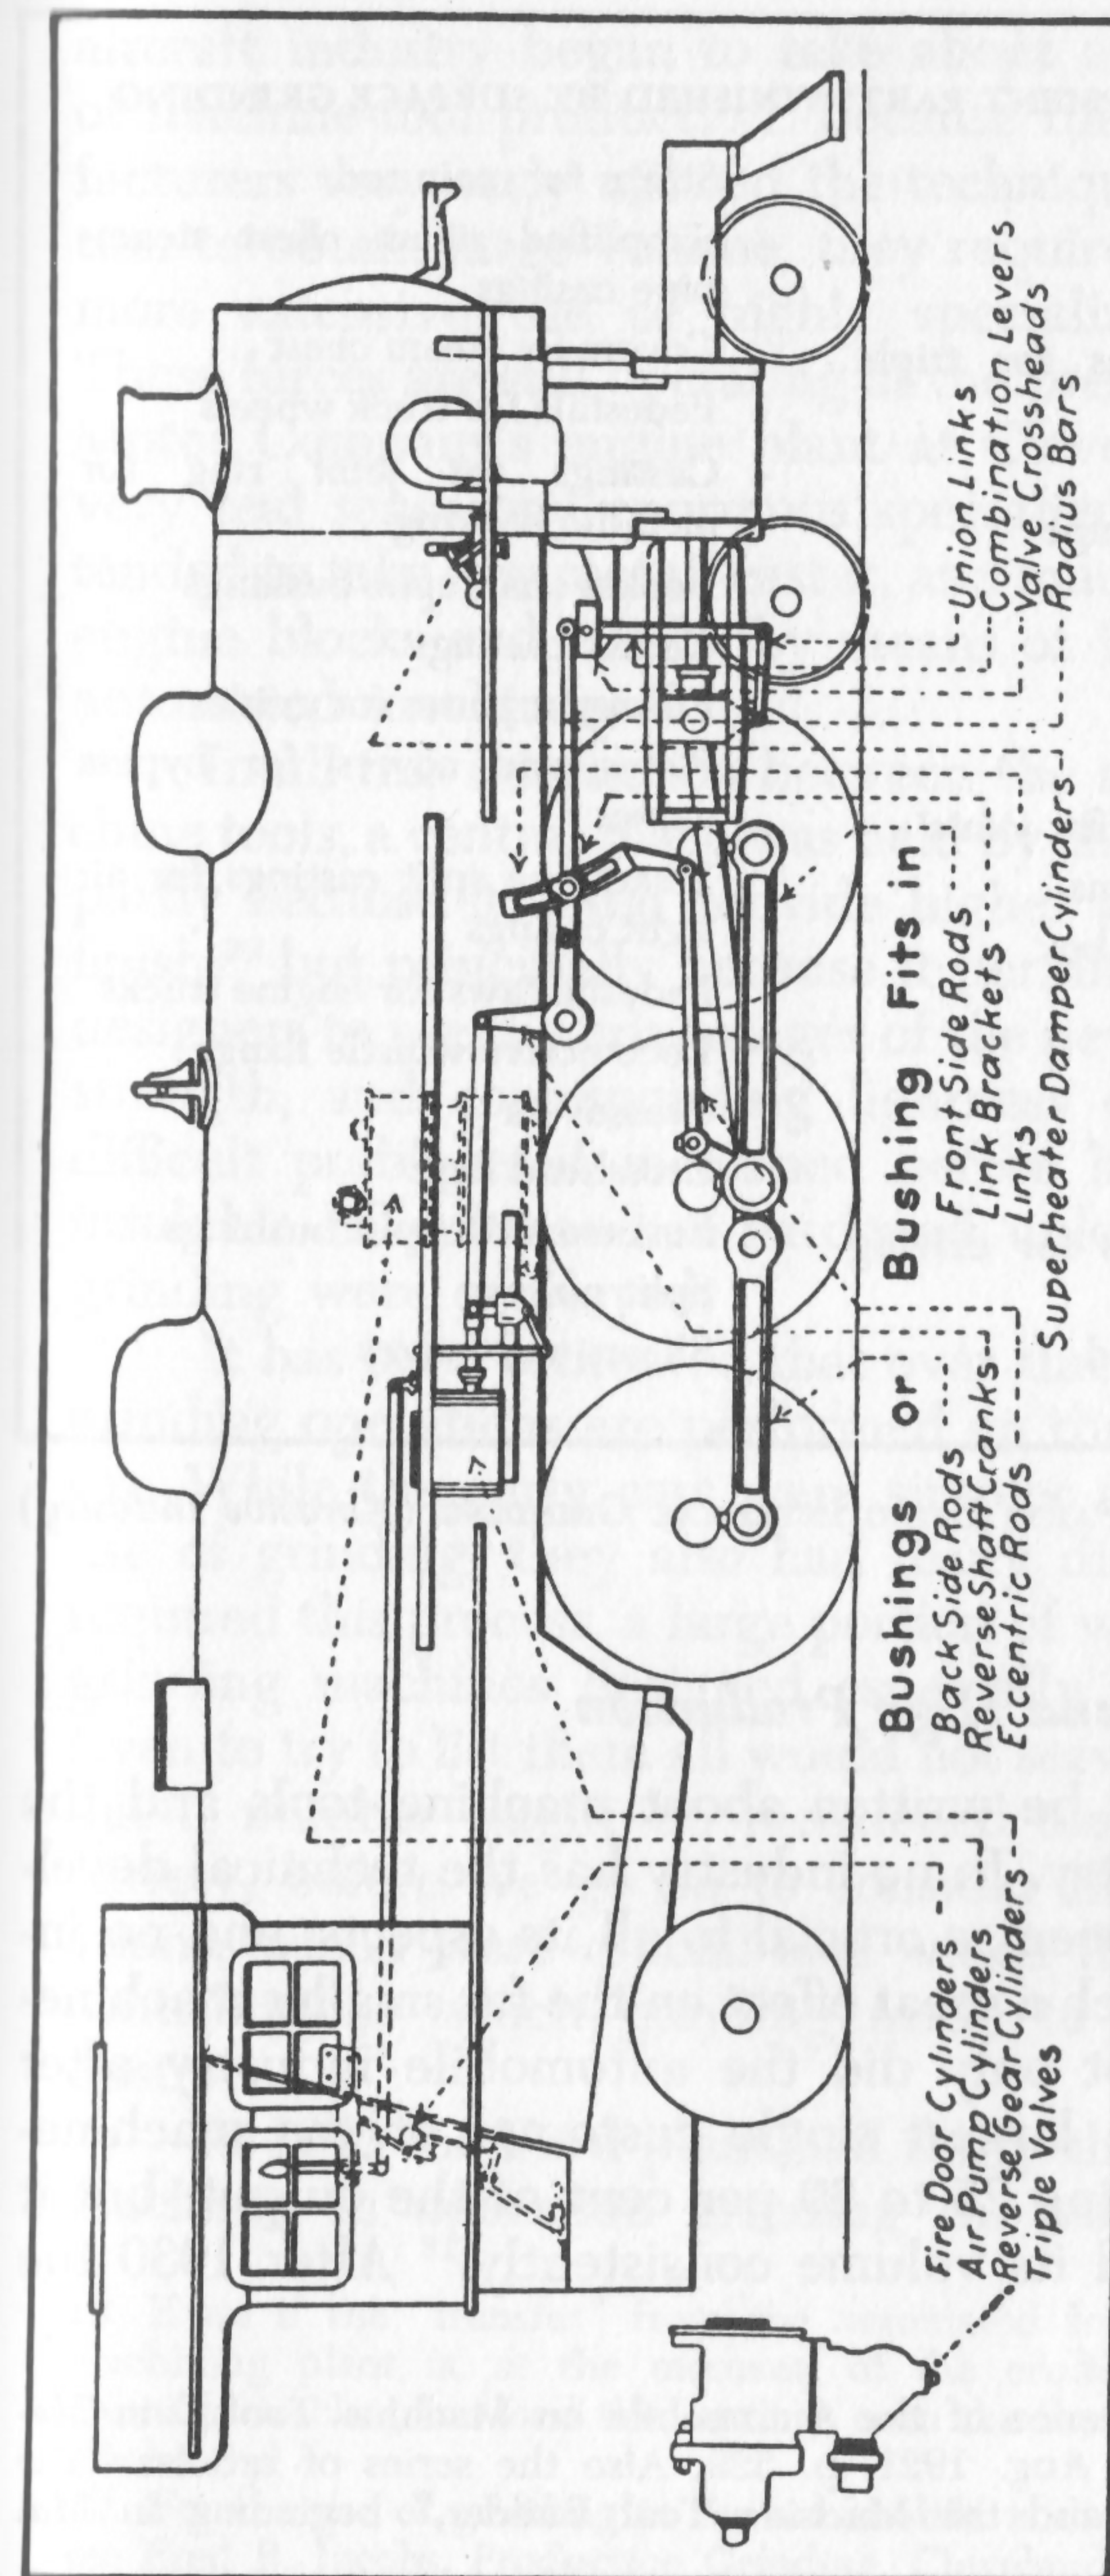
LOCOMOTIVE PARTS USING SURFACE GRINDING (Abrasive Industry)
